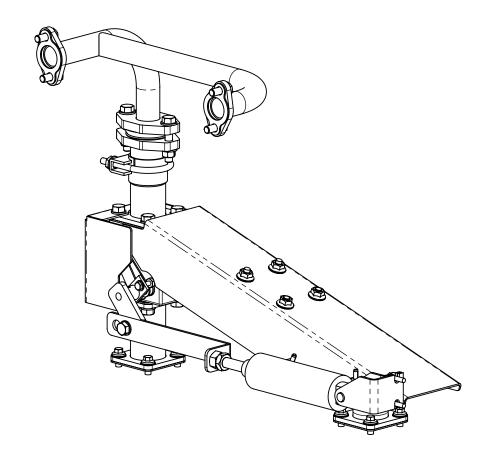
Exhaust Assembly 610-013-747 Rev. B
